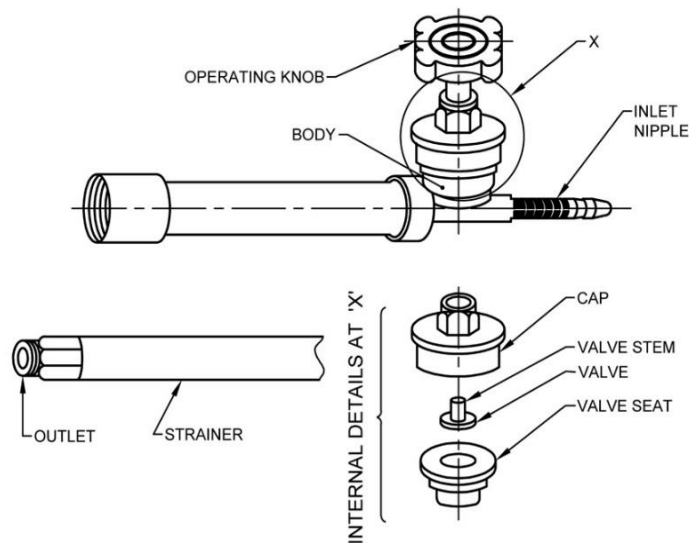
KNOB TYPE (TYPE B) CUT-OFF DEVICE
